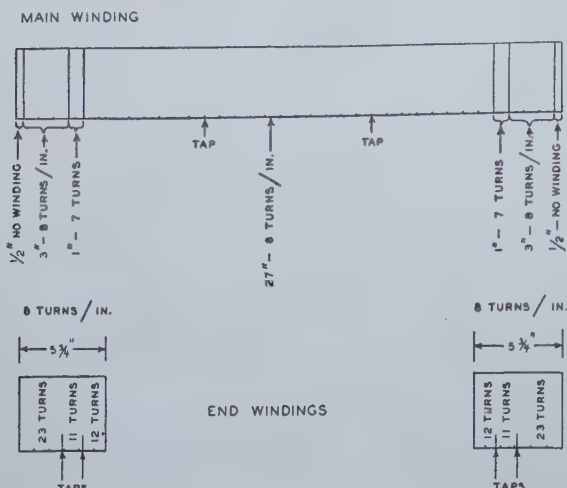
Plan showing dimensions and number of turns per inch of the main and end windings of the single crystal furnace.
